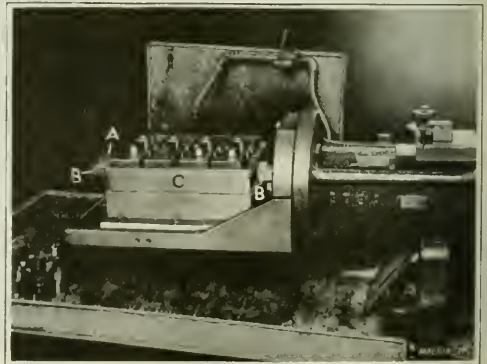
Broaching Chaser Slots in the Smaller Die-heads, using a Gang Fixture
